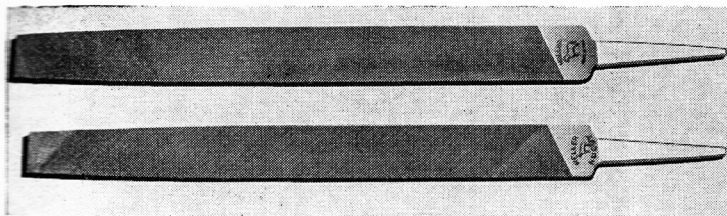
A. A mill file (upper one) with single cut teeth and long angle gives a shear cut. A mill file (lower) designed with a special pattern double cut is used for lathe work, too, and with good results.
